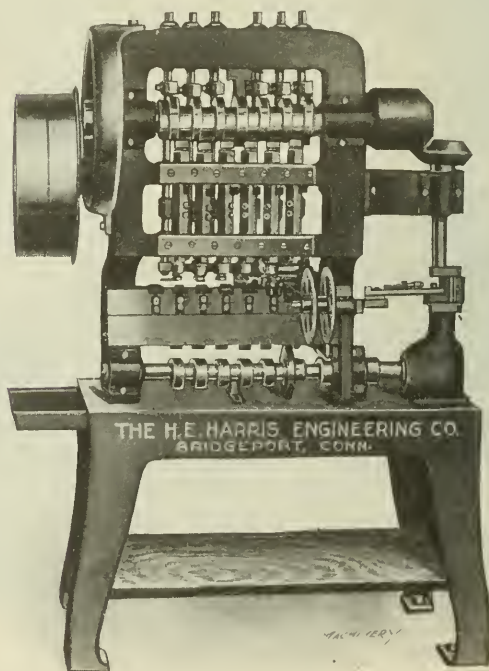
Automatic Multiple-plunger Press built by H. E. Harris Engineering Co.
